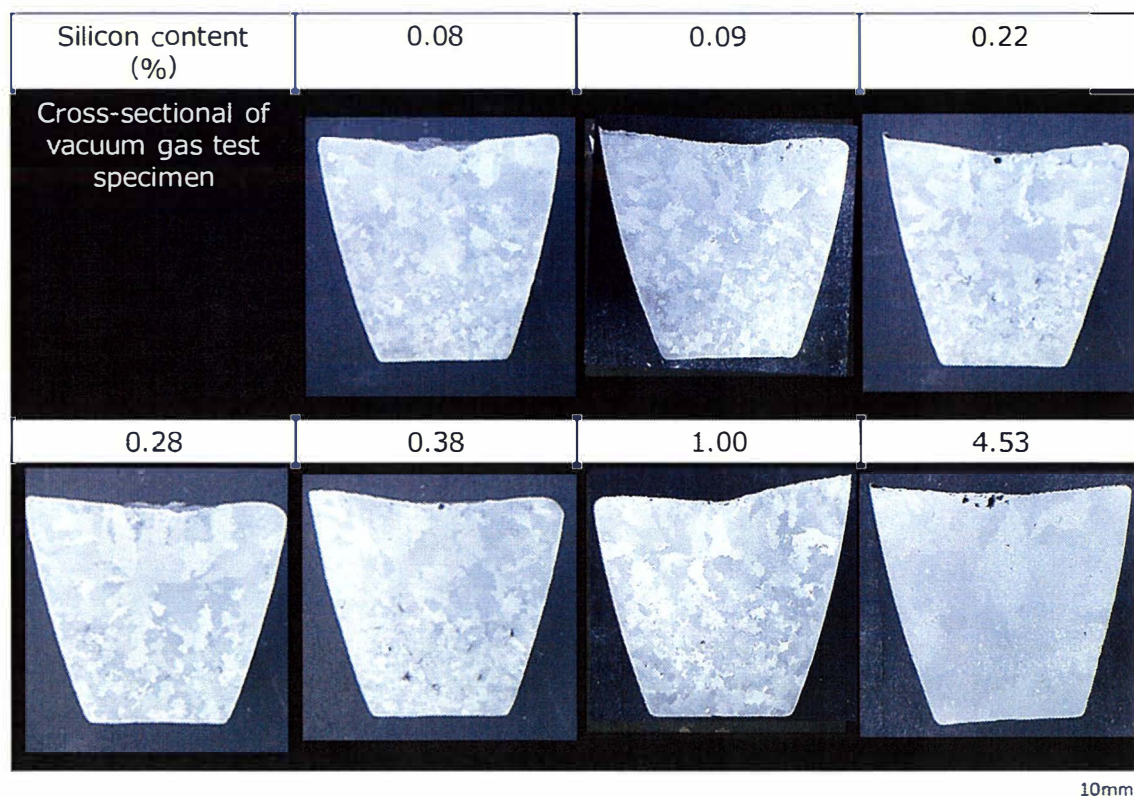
Cross-sectional macrostructure of etched vacuum gas test specimen.
